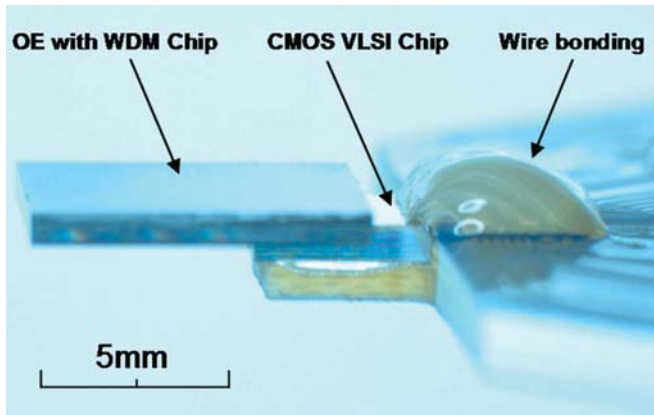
Hybrid integrated WDM transceiver on a test PCB.
